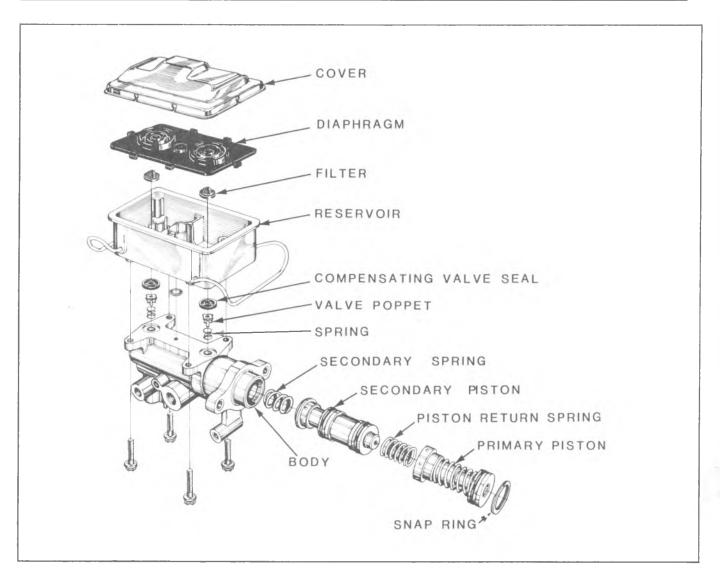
Bendix Mini-Master Cylinder--Exploded View
